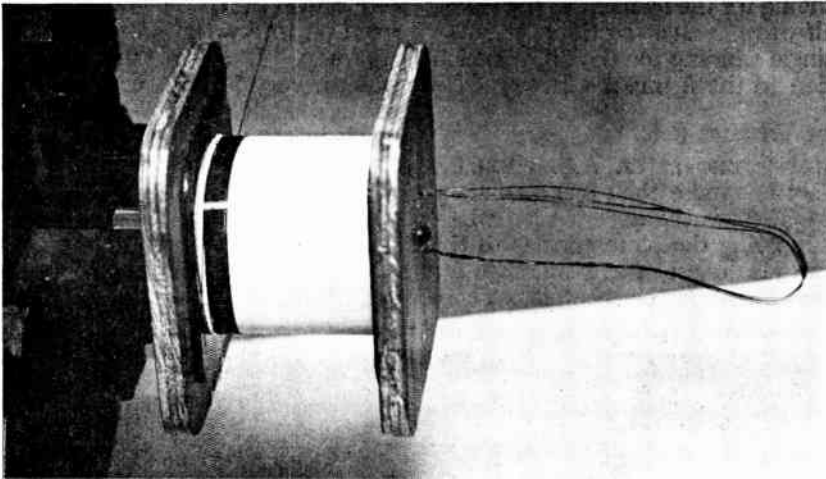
FINISHING OFF THE PRIMARY WINDING (1).
